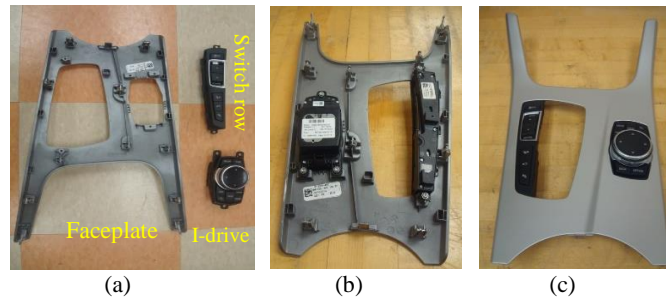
Assembly of automotive center console, (a) the components (parts) to be assembled, (b) back, and (c) front views of the assembled product (center console) [courtesy: BMW Manufacturing Co., Spartanburg, SC, USA].
